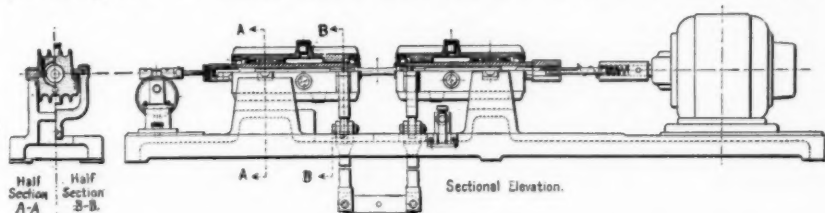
Short-Specimen Plain-Bearing Rotating-Beam Fatigue Machine.
